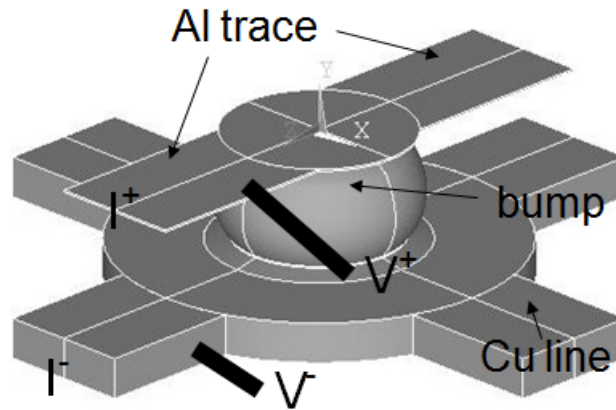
Proposed layout of Kelvin structure for measuring bump resistance of the flip-chip solder joint.
